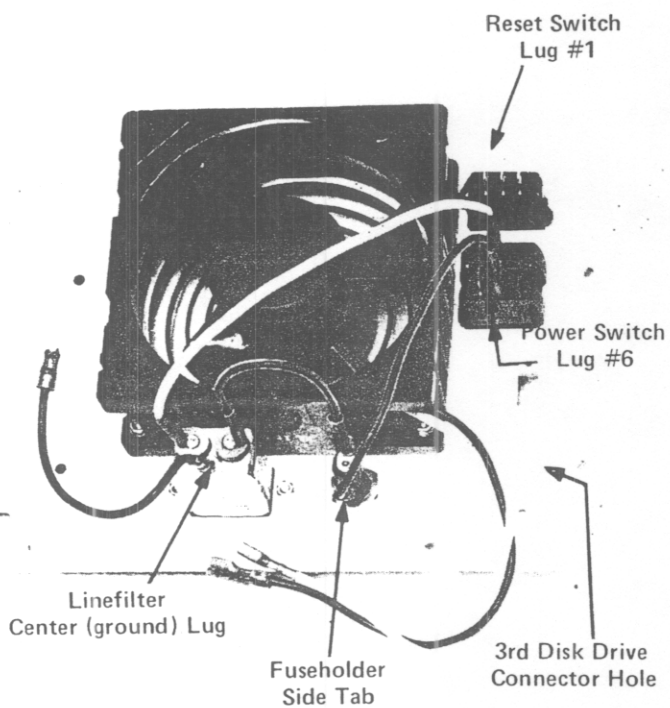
P. View of Inside of Back Panel after Assembly Step P11.
